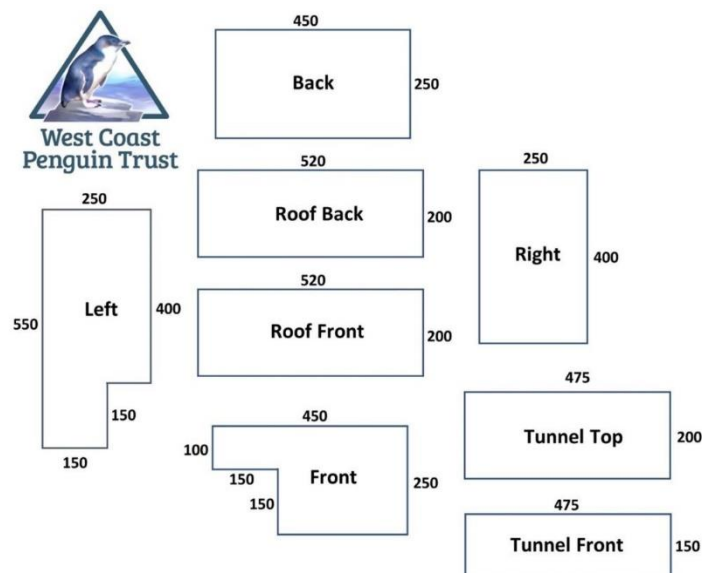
Details of the dimensions for a box with an external sideways tunnel designed by the West Coast Penguin Trust.
